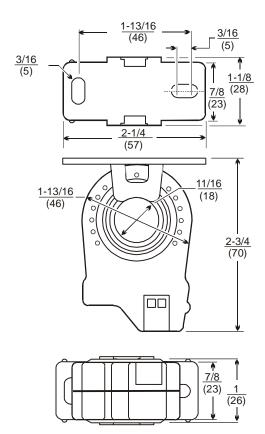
R310A Series Switch and mounting bracket dimensions, in. (mm)
